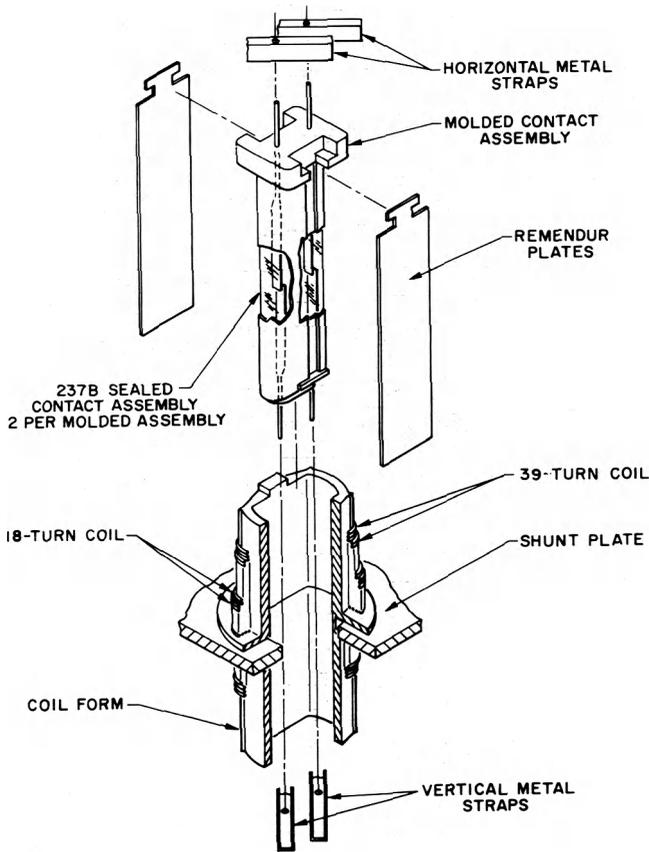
Ferreed Crosspoint Switch (Exploded View)
